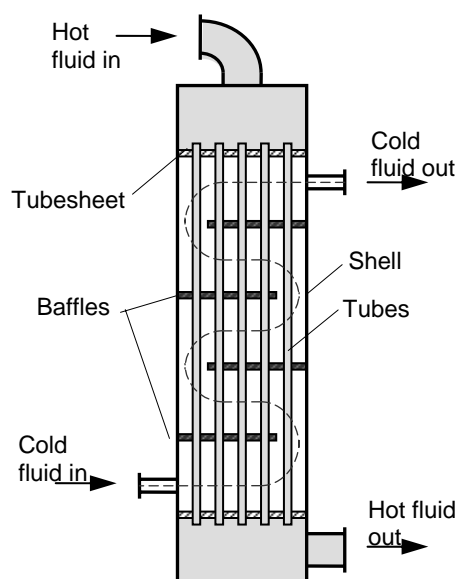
1-1 Shell-and-tube heat exchanger with single segmental baffles and fixed tubesheets
